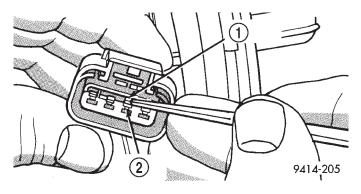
Wire Terminal Locking Finger 1 – LOCKING FINGER
